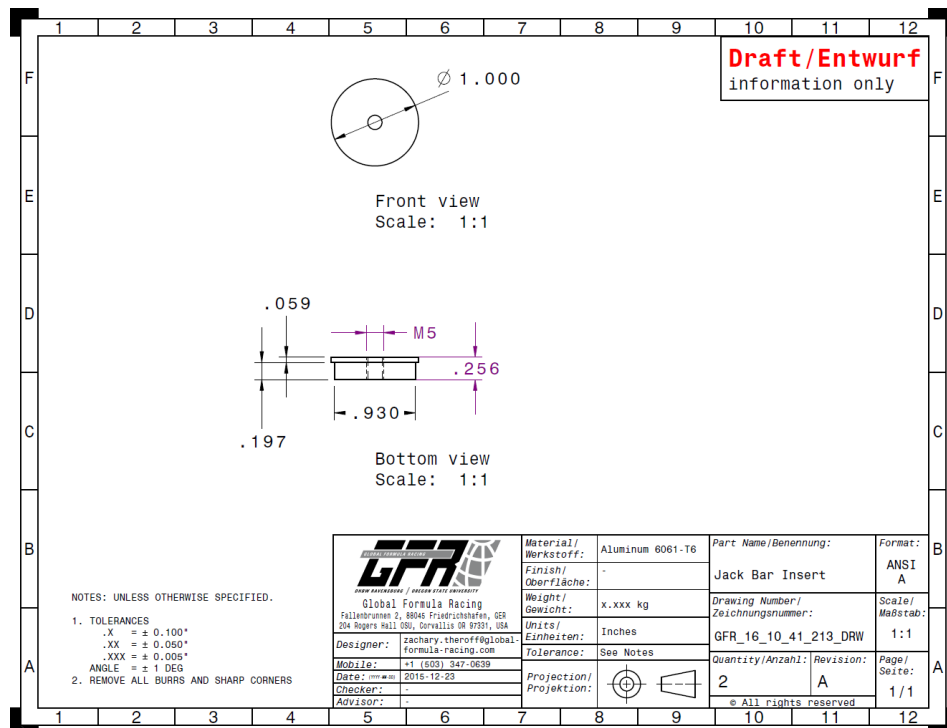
Jack bar inserts, with threaded holes for M5 bolts, to be welded into the jack bar tube.
